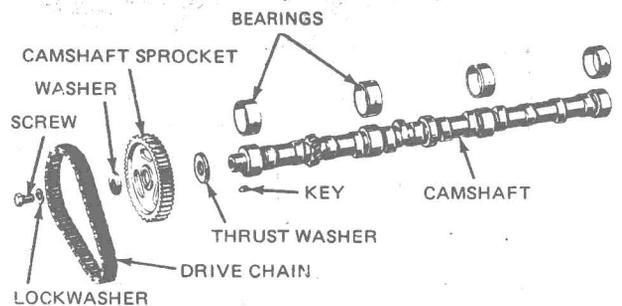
Camshaft and related parts for a six-cylinder engine. (Ford Motor Company)
